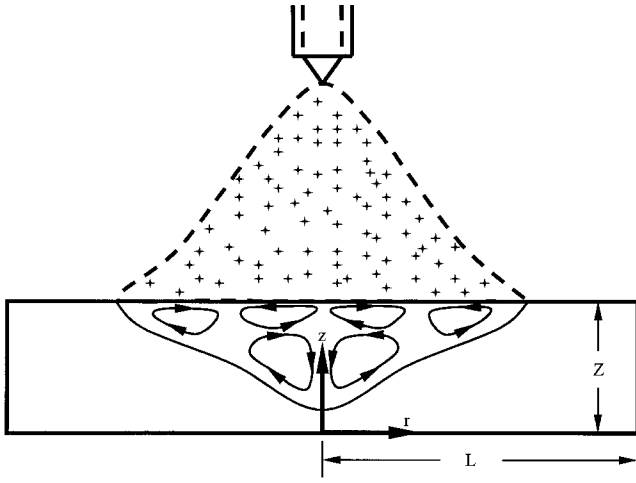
Schematic sketch of a stationary GTAW system and dimensions of the welding workpiece.
